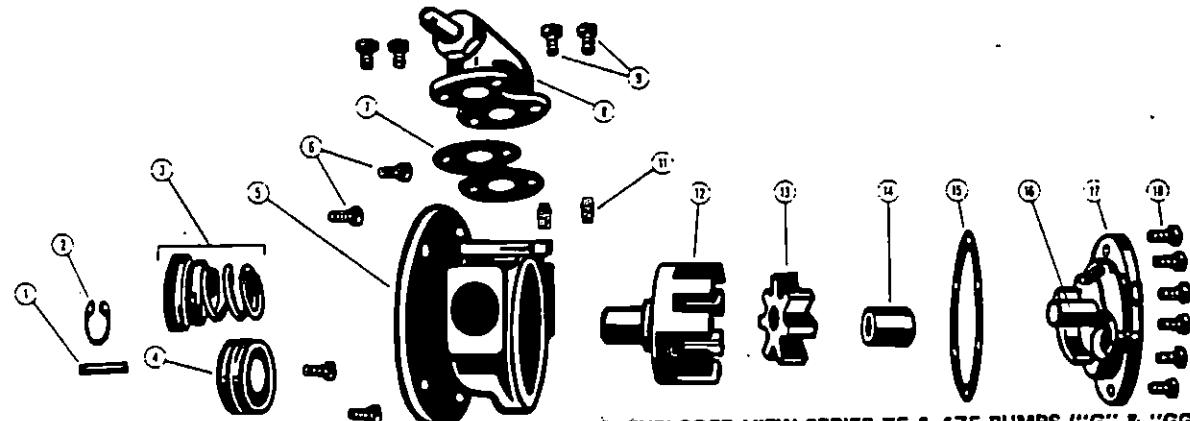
EXPLODED VIEW SERIES 75 & 475 PUMPS ("G" & "GG" SIZE)
